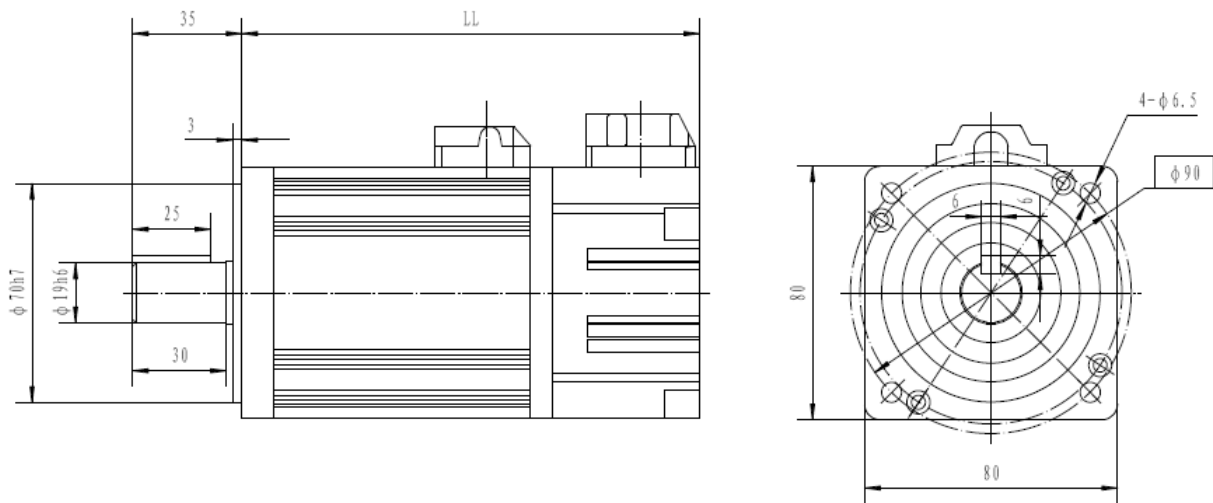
The dimension of 80 series AC servo motor (unit:mm)
